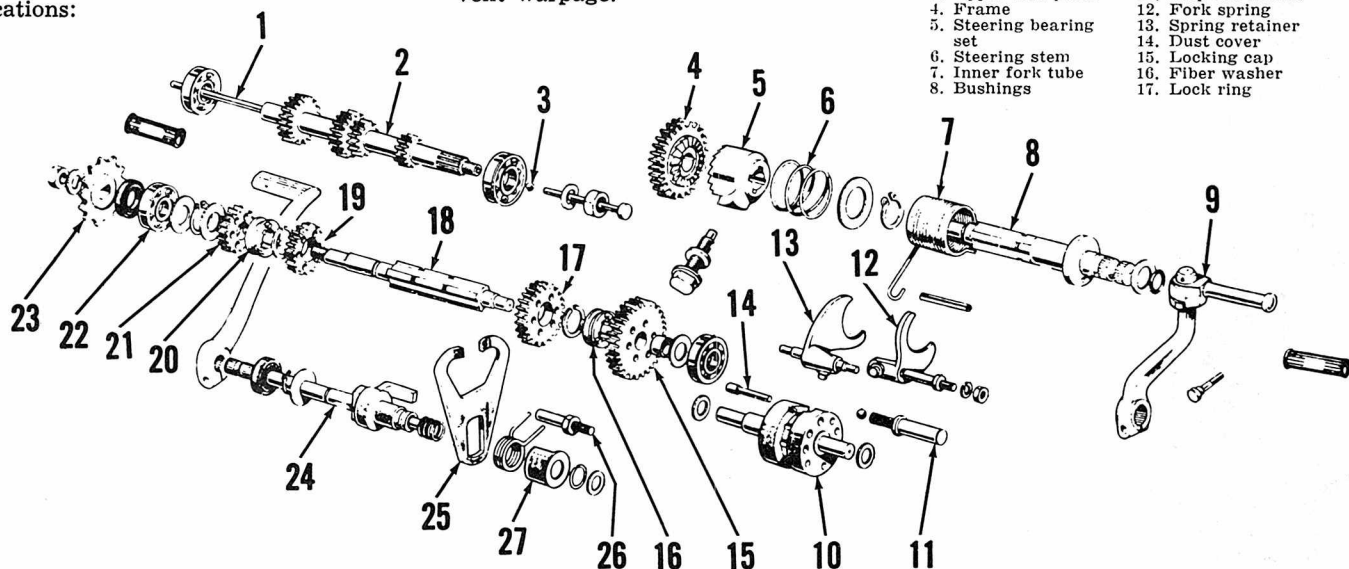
Exploded view of transmission and kickstarter assembly.
